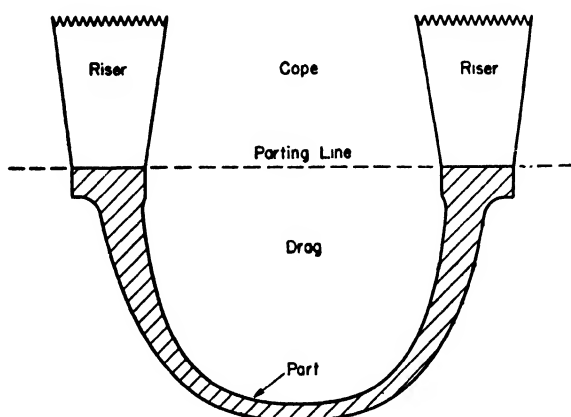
Cross-section of simple shell with two bosses showing use of tapered section to control directional solidification. If the casting must have a uniform wall thickness, the extra padding may be removed by machining.
